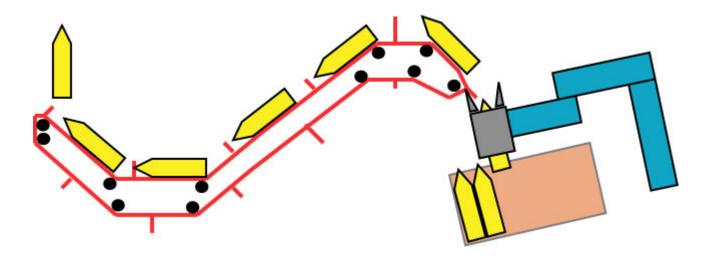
Servo Motors and Support Rollers for Flexible Conveyor – Nominal Position
